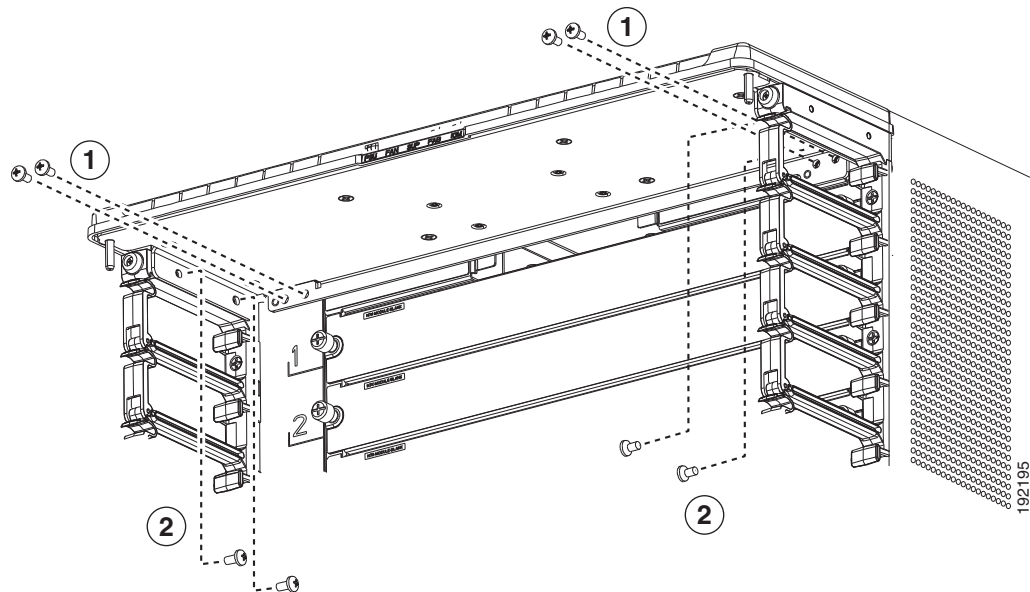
Positioning the Top Hood with the Upper Cable Management Assemblies and the Switch Chassis
